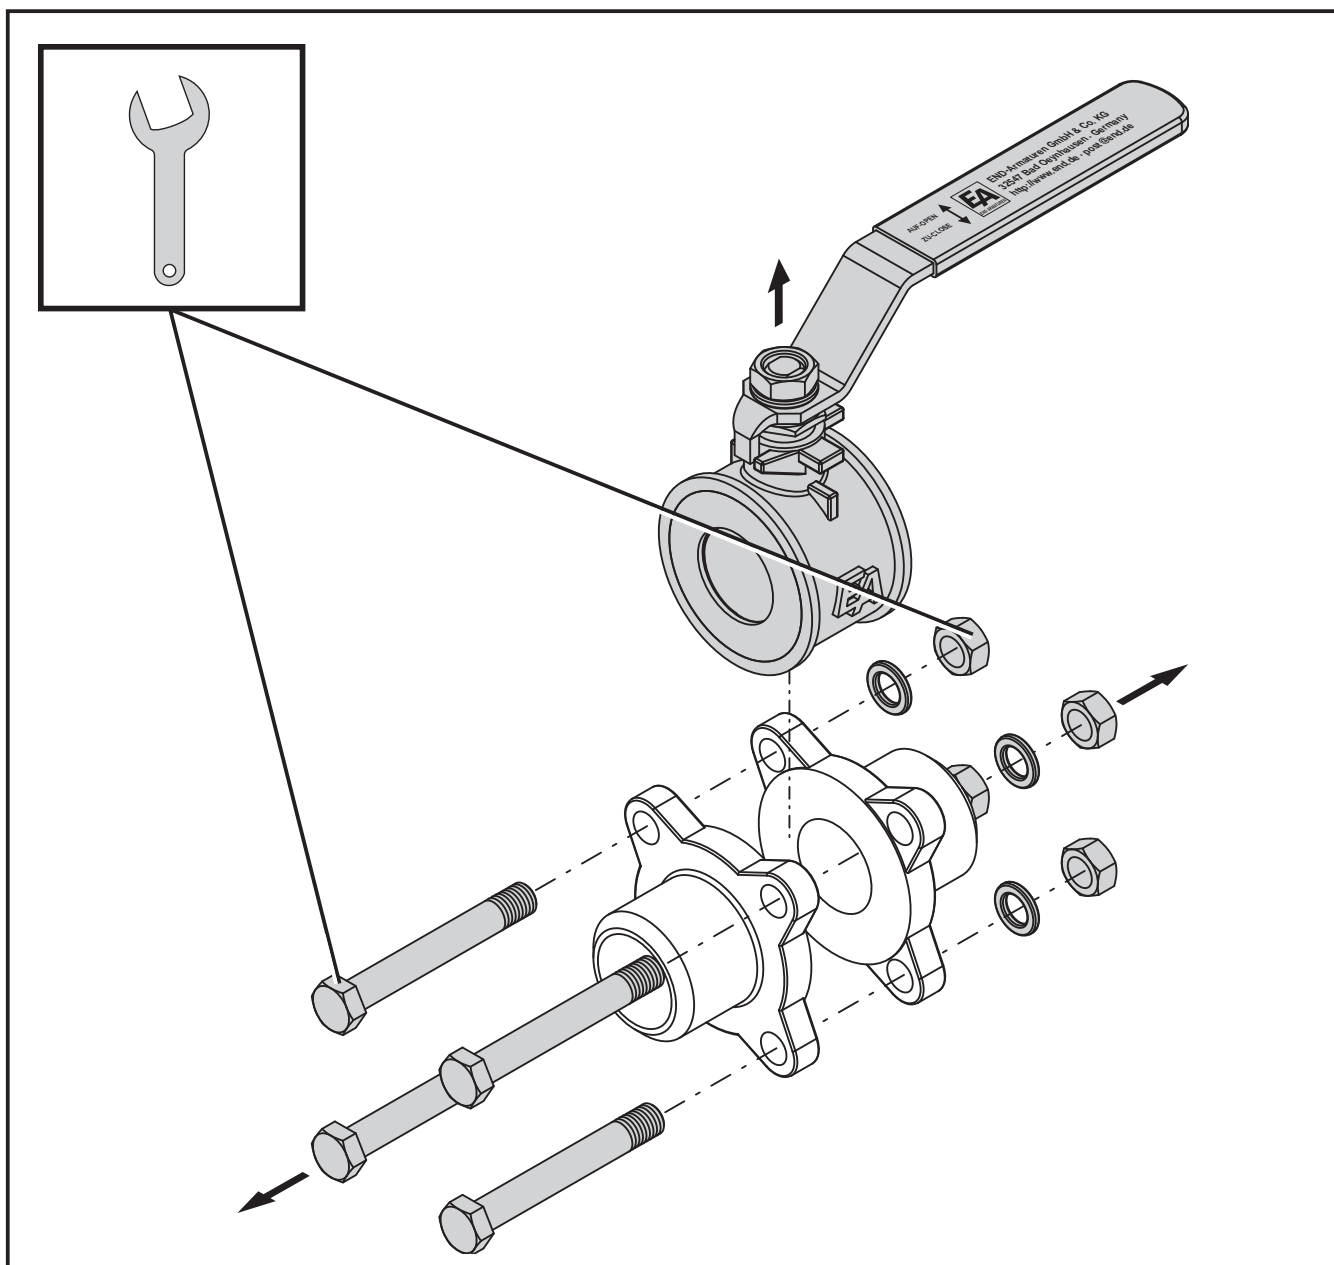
ball valves, mounting welded connection, disassembly of the center part (Fig.: Art. ZE311064)
